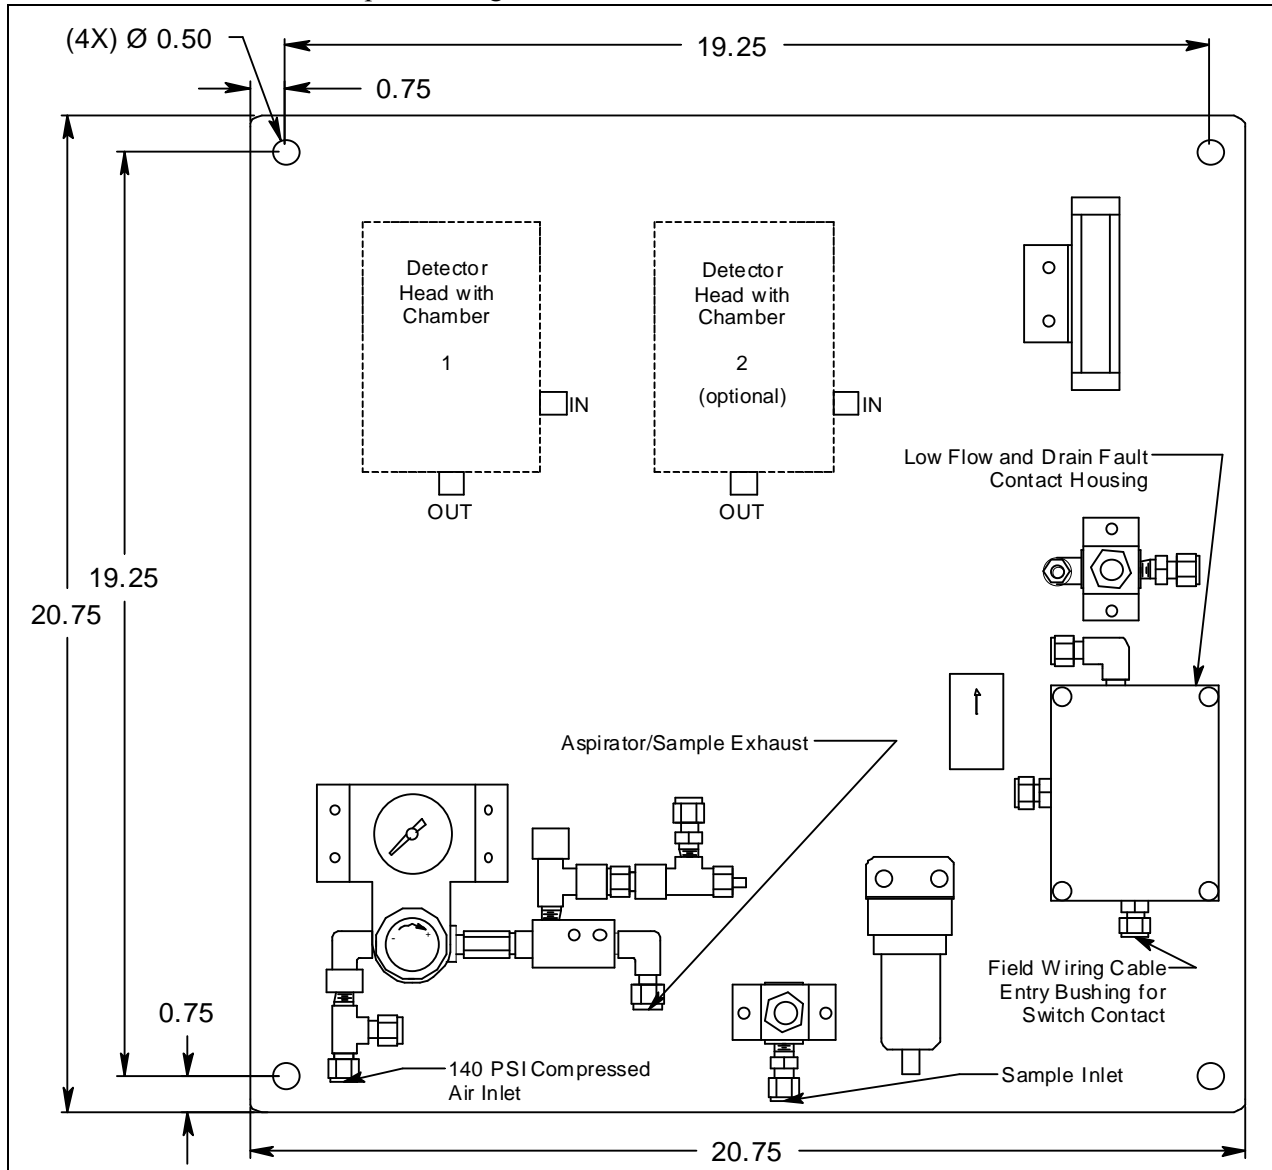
Outline & Mounting Dimensions, 1-2 Detector Plate
